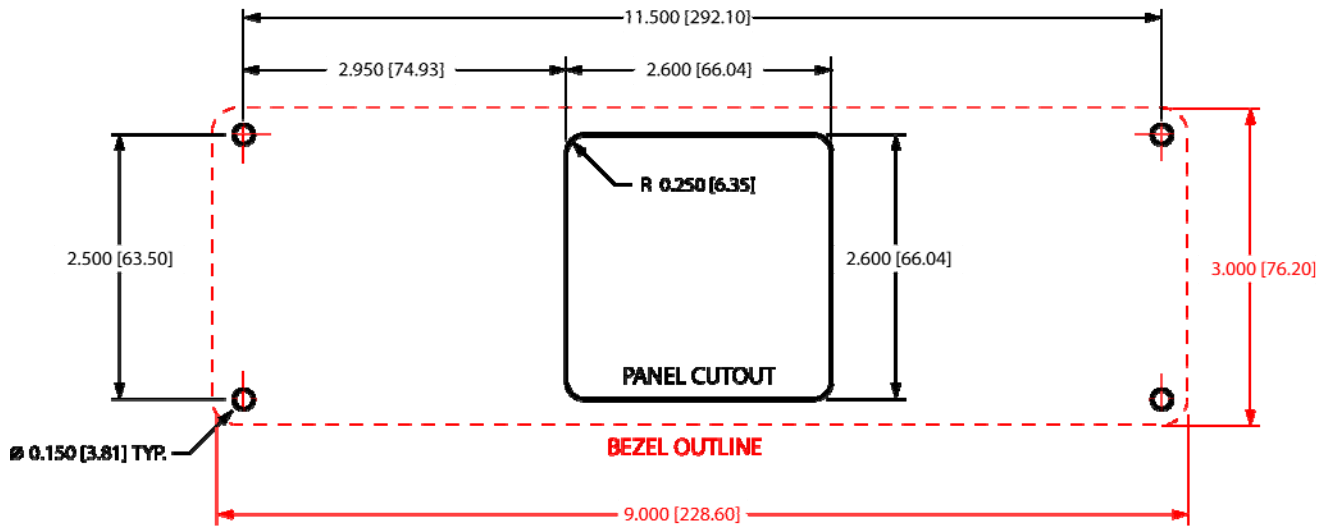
1Touch, 12 position installation dimensions in inches [millimeters].
